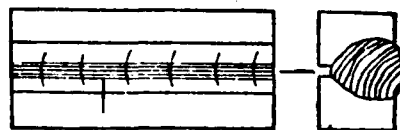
Incomplete penetration of root in one-sided welding
